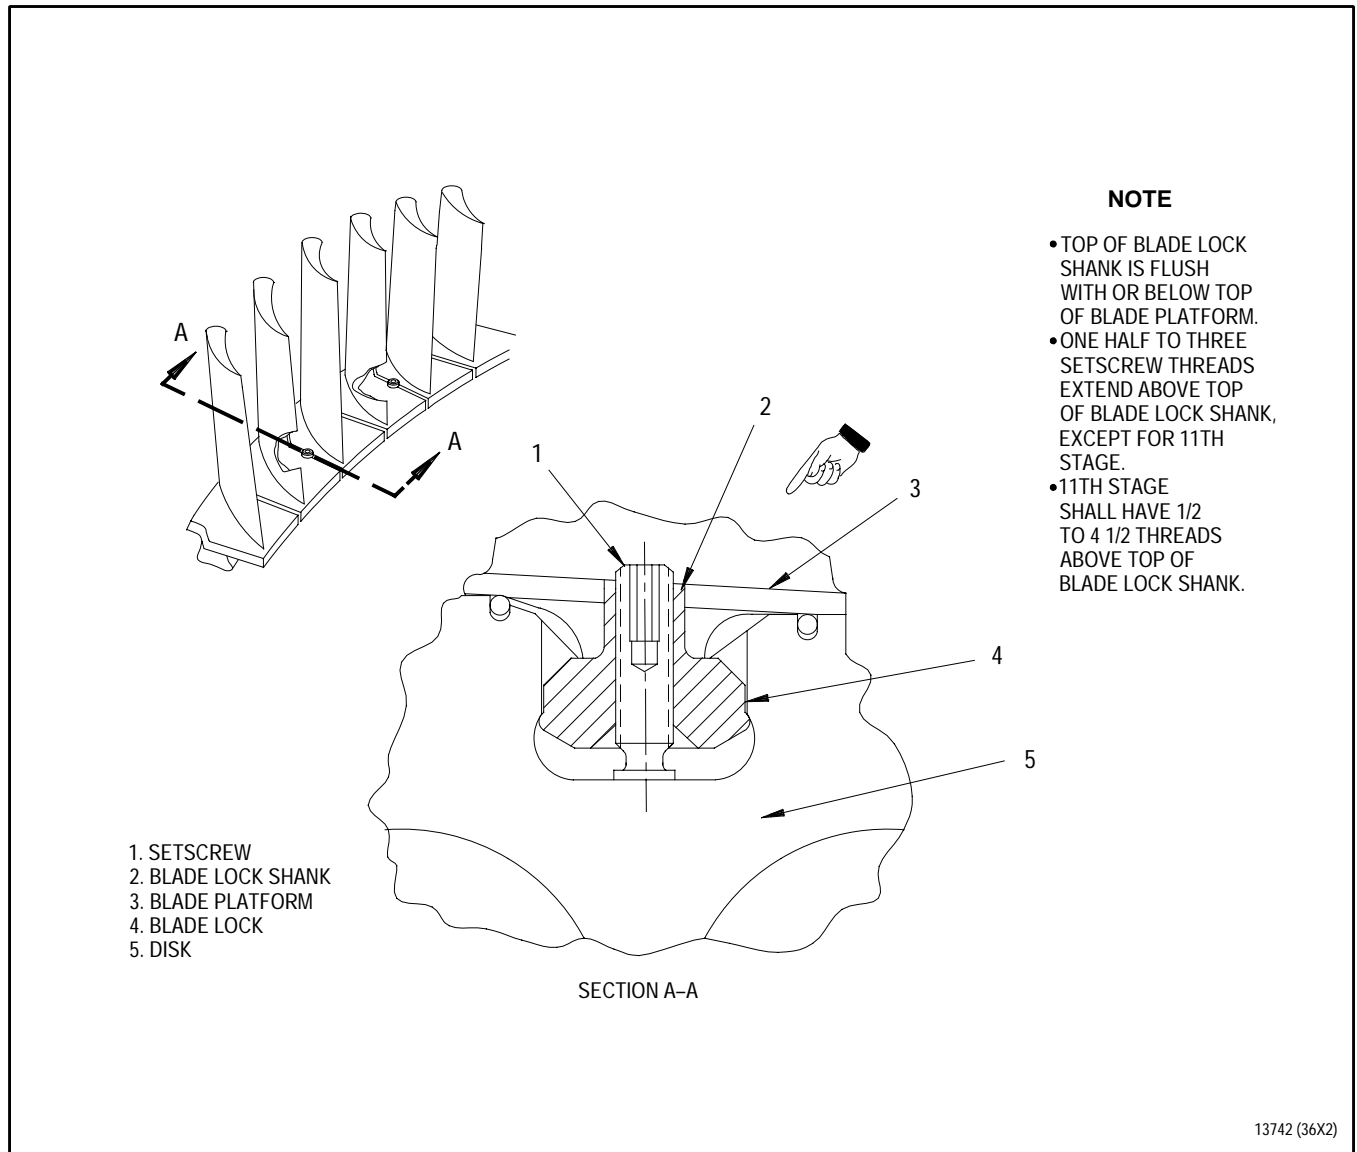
Compressor Rotor Blade Lock - Installation (Typical)
